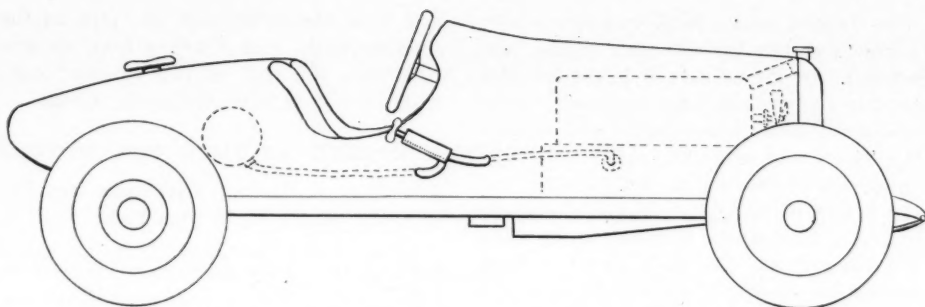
Suggested method of connecting oil pump on side of racer body with oil tank in rear and motor crankcase
